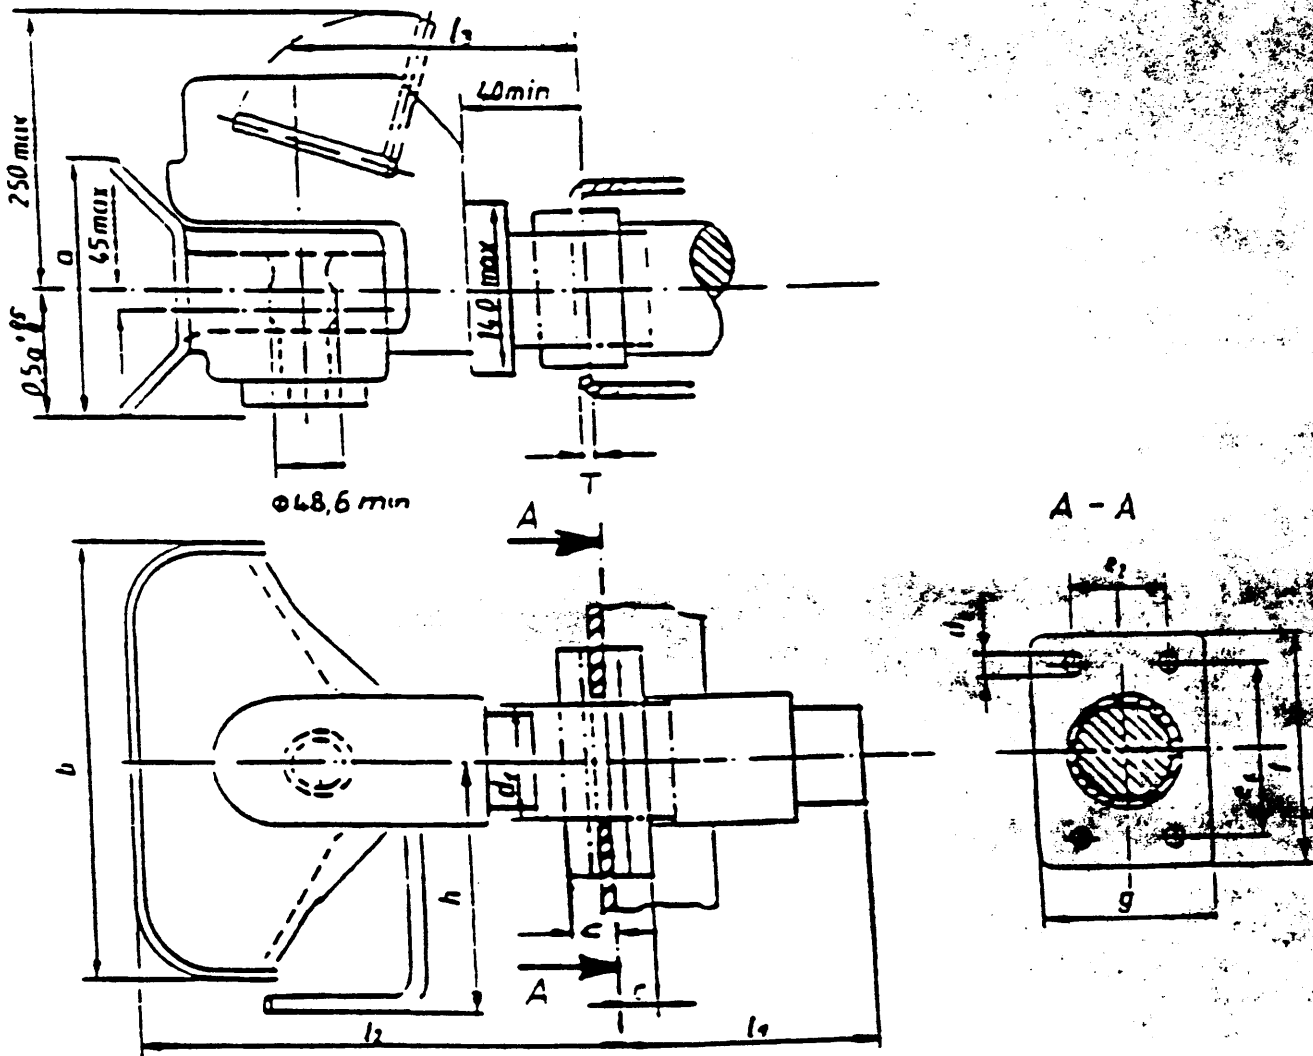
Dimensions of the standard drawbar coupling (mm), see Table 3
